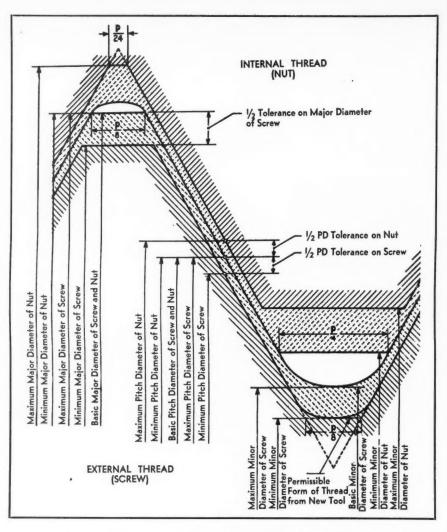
General character of tolerances and crest clearances for Classes 3A, 3B, 2 nd 2.
